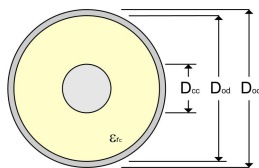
Critical Dimensions for the Miniature Coaxial Cable.
